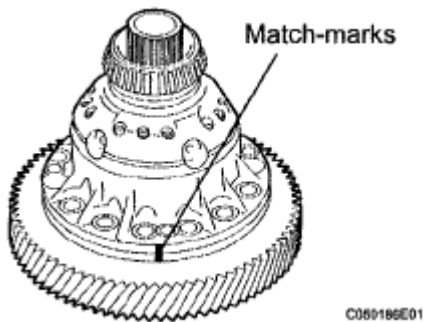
Identifying Matching Marks On Front Differential Ring Gear
